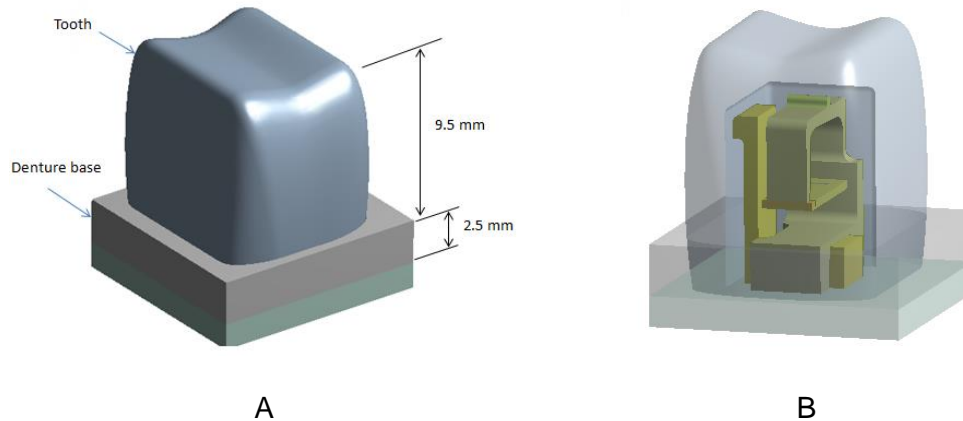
Full assembly of the sensing mechanism, tooth and denture base. A, Isometric exterior view of the assembly. B, Transparent view showing vertical and horizontal force sensing structures inside the tooth
